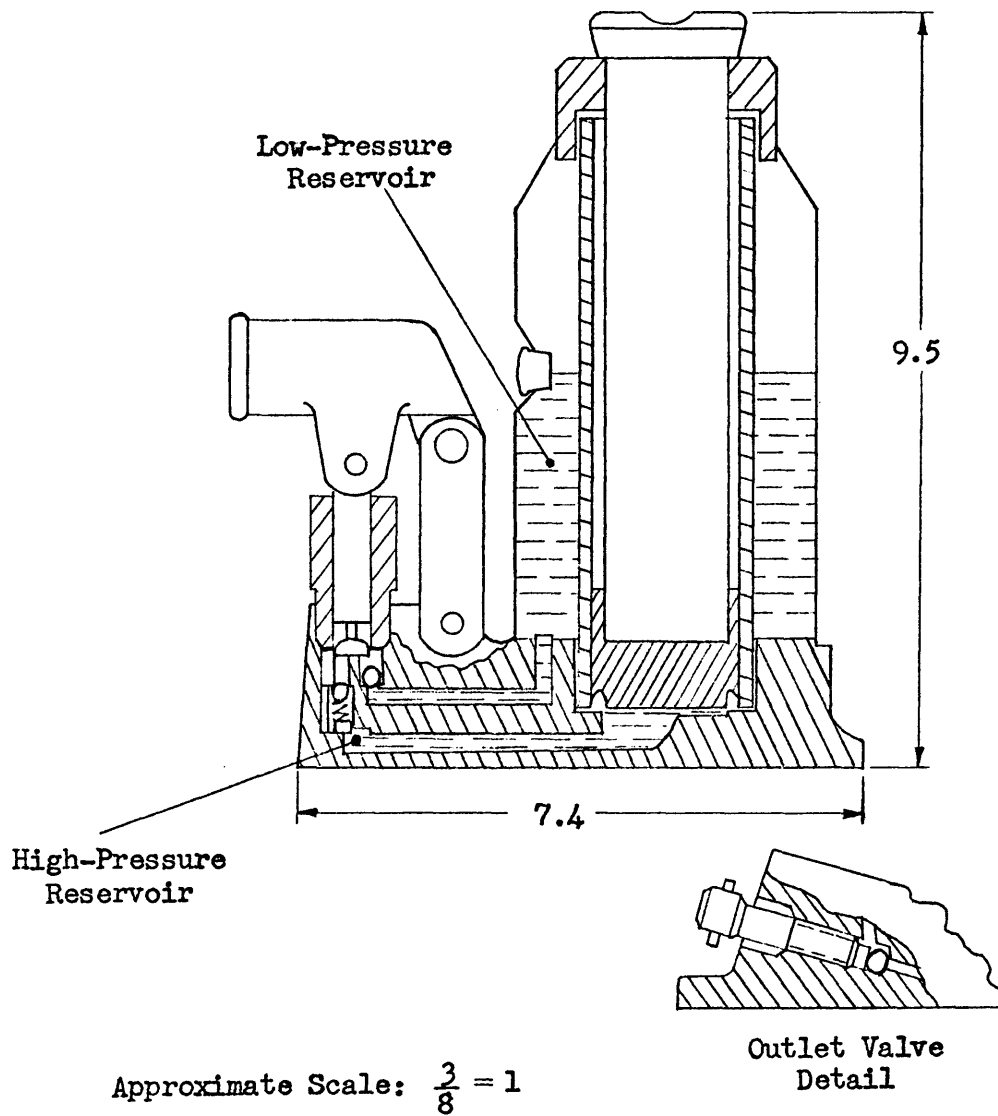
Typical Hydraulic Jack with Outlet Valve Detail.
